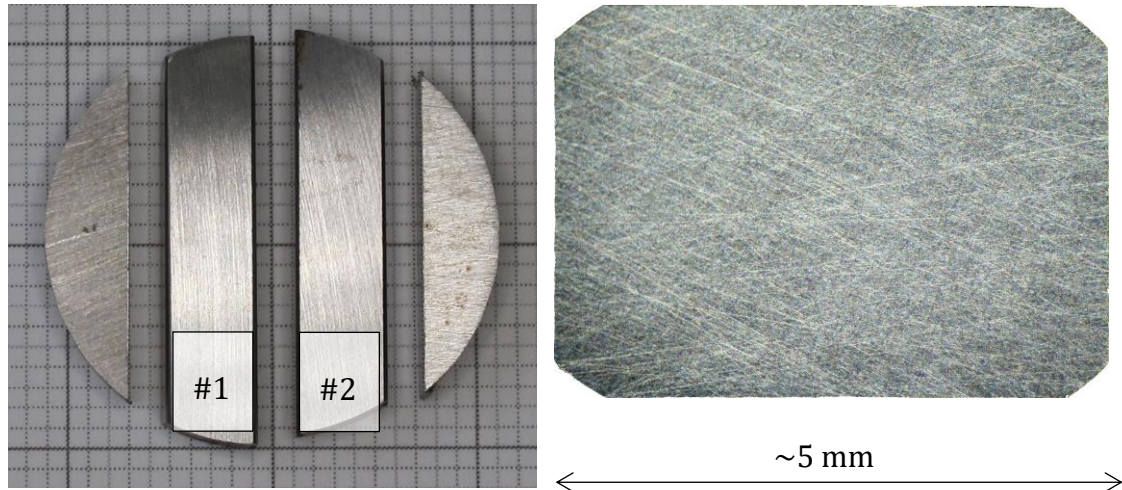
Cut SPS'ed sample - two final tested beams and their crosssection
